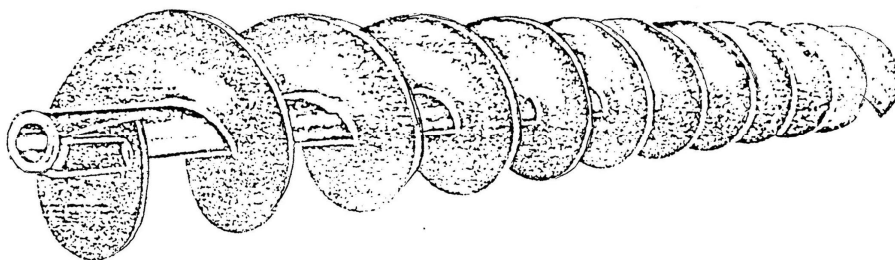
Right hand Screw Conveyor used in preheating chamber
